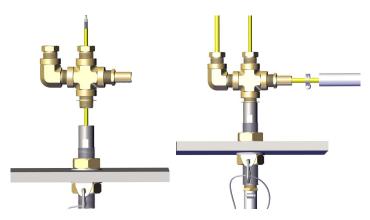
Step 8 Attach crossfitting and connect exterior hose.
